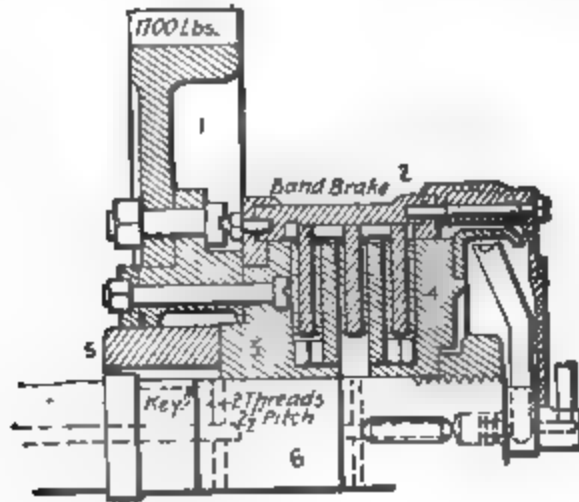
Sellers Type Disc Friction Brake for Boat Crane
